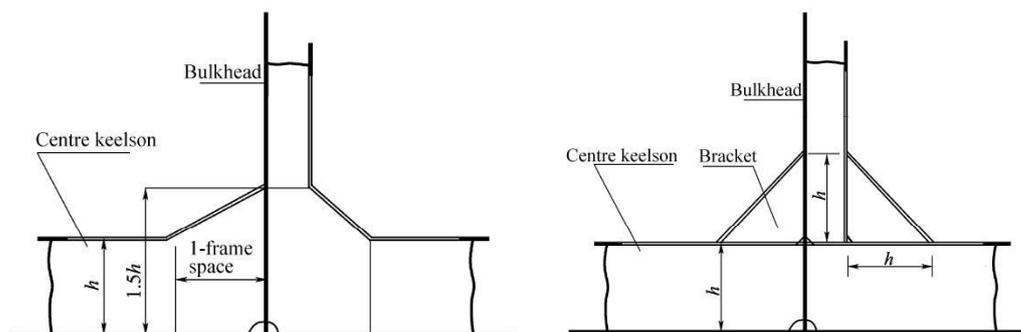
(1) Type of web rise connection Figure 2.4.2.2(2) Type of bracket connection
